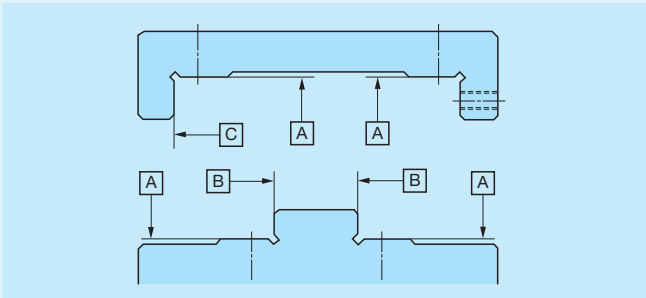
Example of processing of CRWG, CRWG...H and CRW mounting surface
